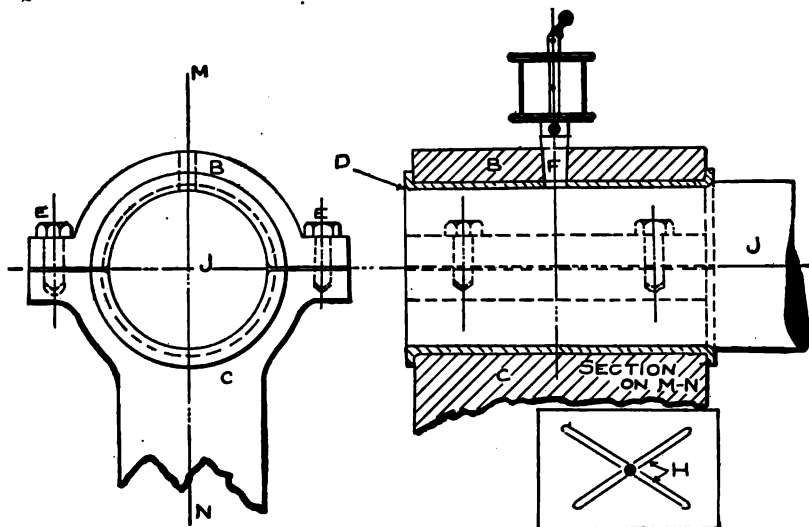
SEC. 7a.—Journal bearing with sliding contact.
